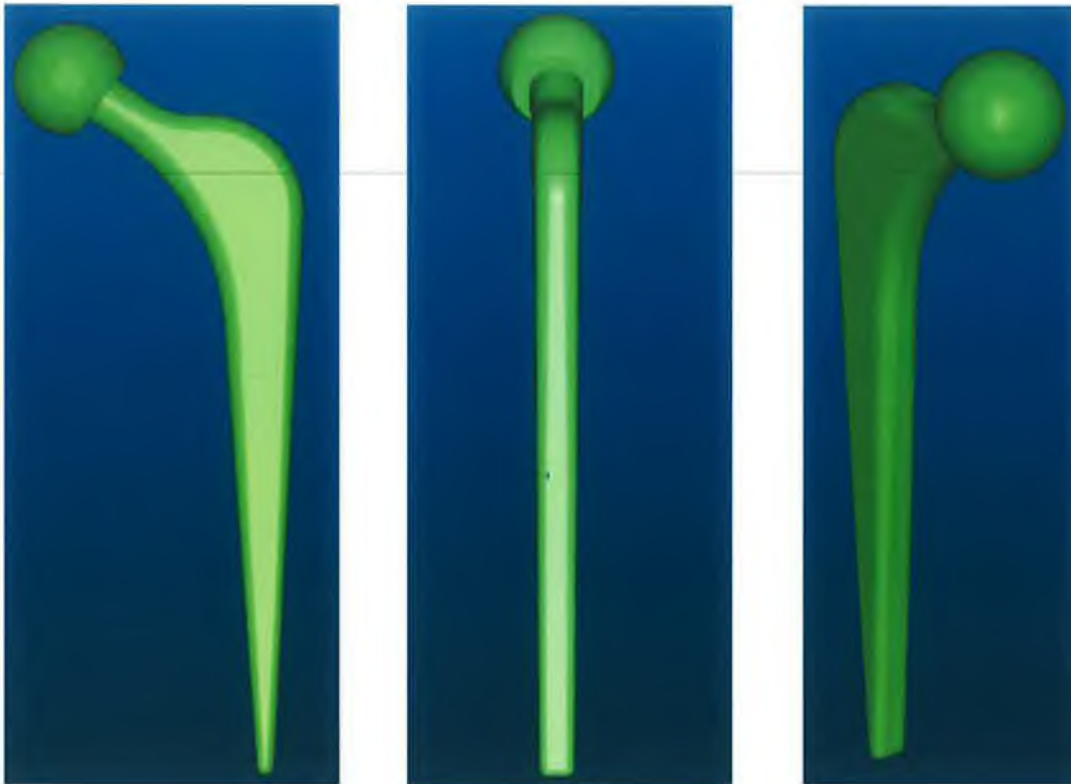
3-D CAD solid model of No.2 44 mm Exeter™ V40™ stem prosthesis with a 26 mm diameter head (Left) Elevation view (Middle) End-view (Right) Auxiliary view
